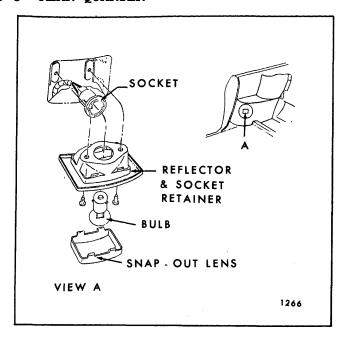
Rear Quarter Arm Rest Courtesy Lamp
